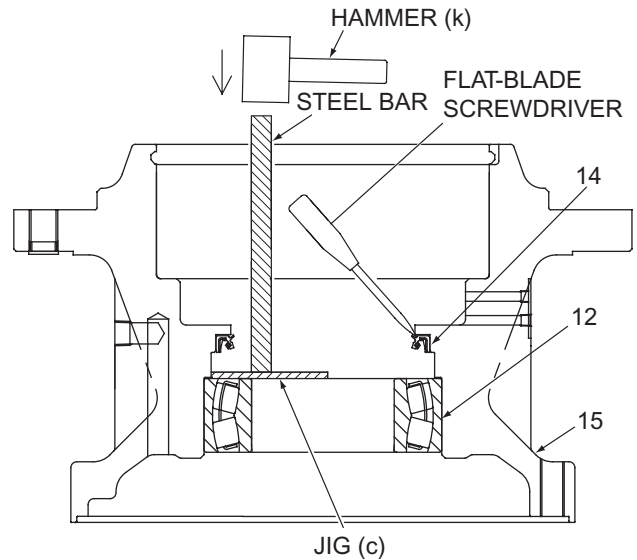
Removing spherical bearing (upper) (12) and oil seal (14)
